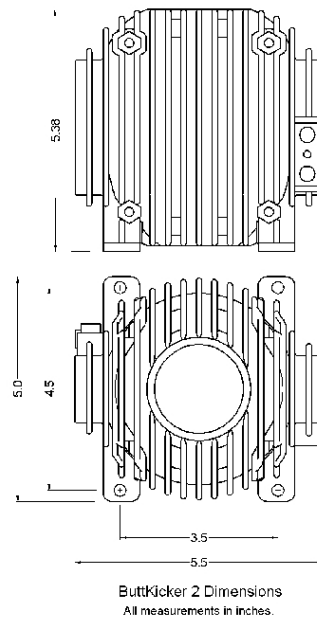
Guitammer ButtKicker™ 2 Dimensions [BUTT 03].
